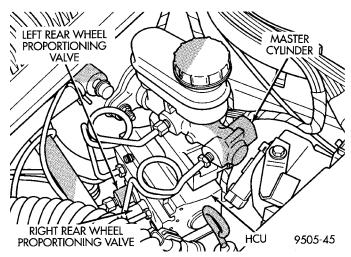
Rear Wheel Proportioning Valve Location On HCU
